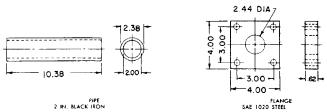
Surge Chamber Outlet Pipe Assembly
